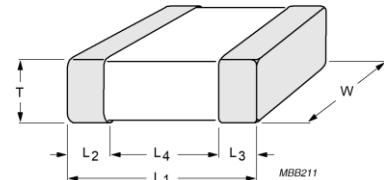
Surface mounted multilayer ceramic capacitor dimension
